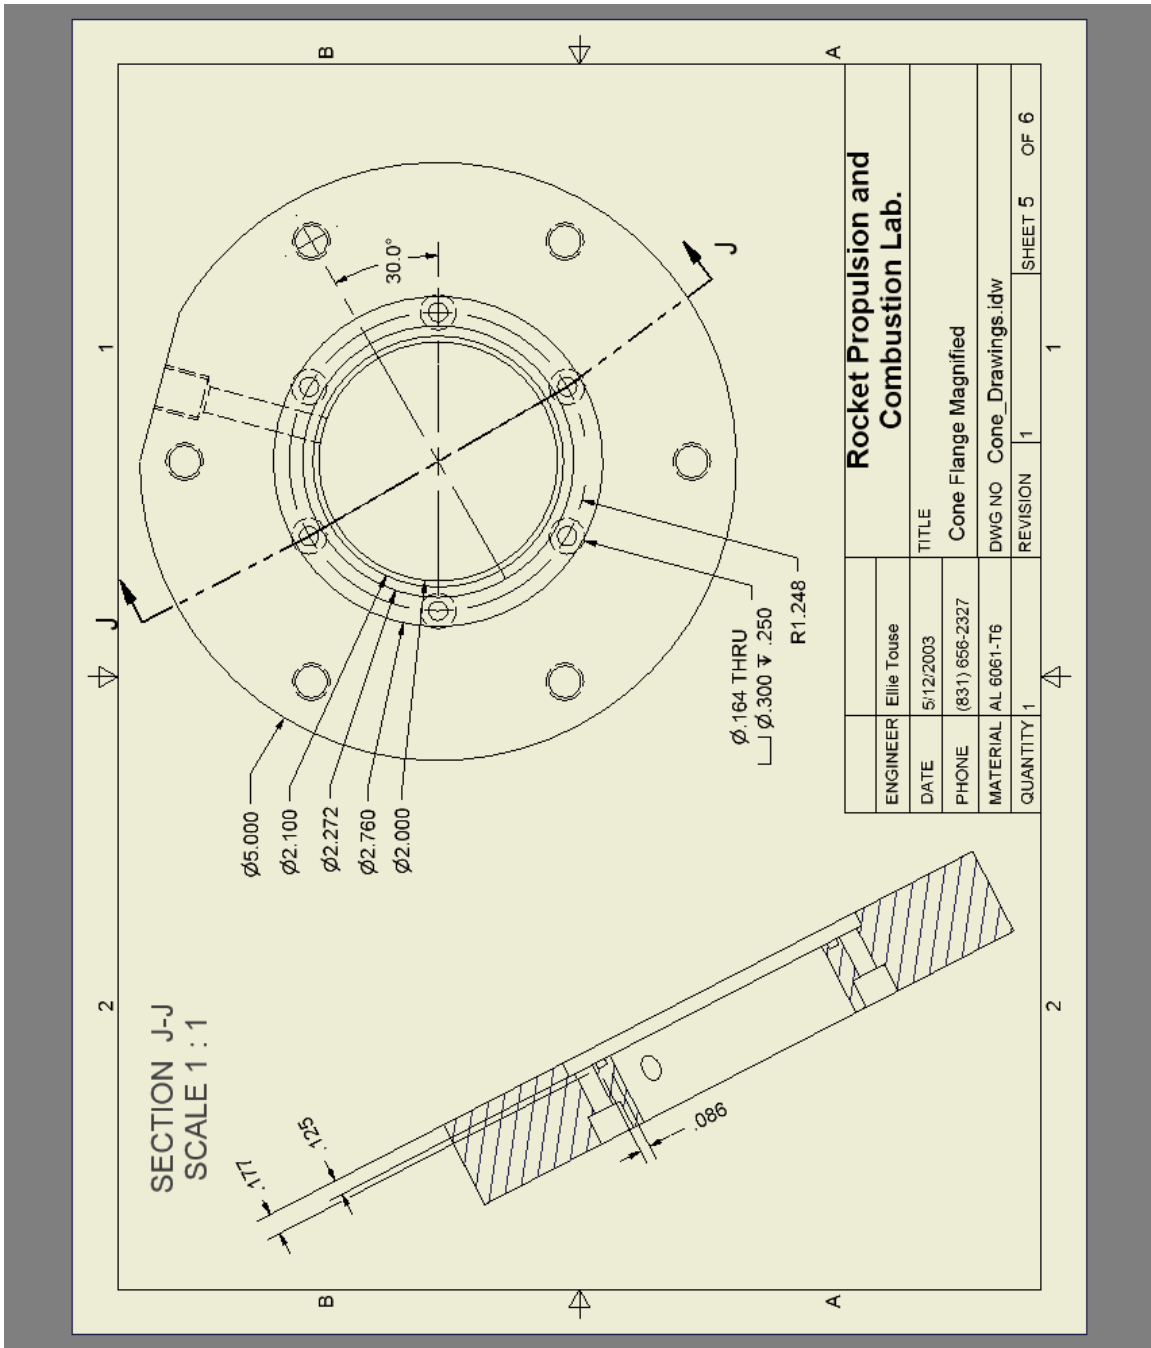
Cone Flange for Axisymmetric Test Section (Drawing 2 of 3)
